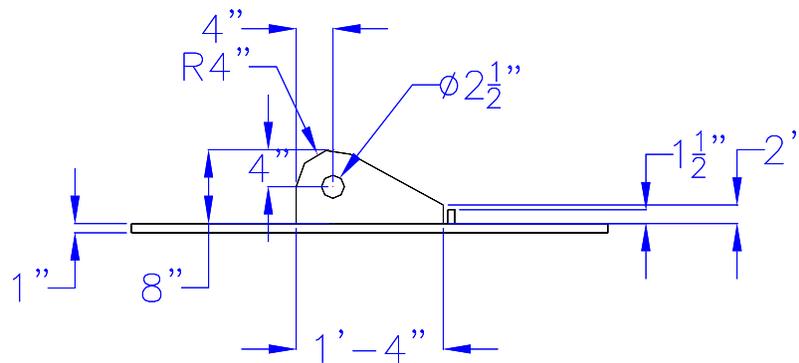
Expedient Anchor Plate Elevation View with Dimensions (Steel Anchor Post Not Shown)
